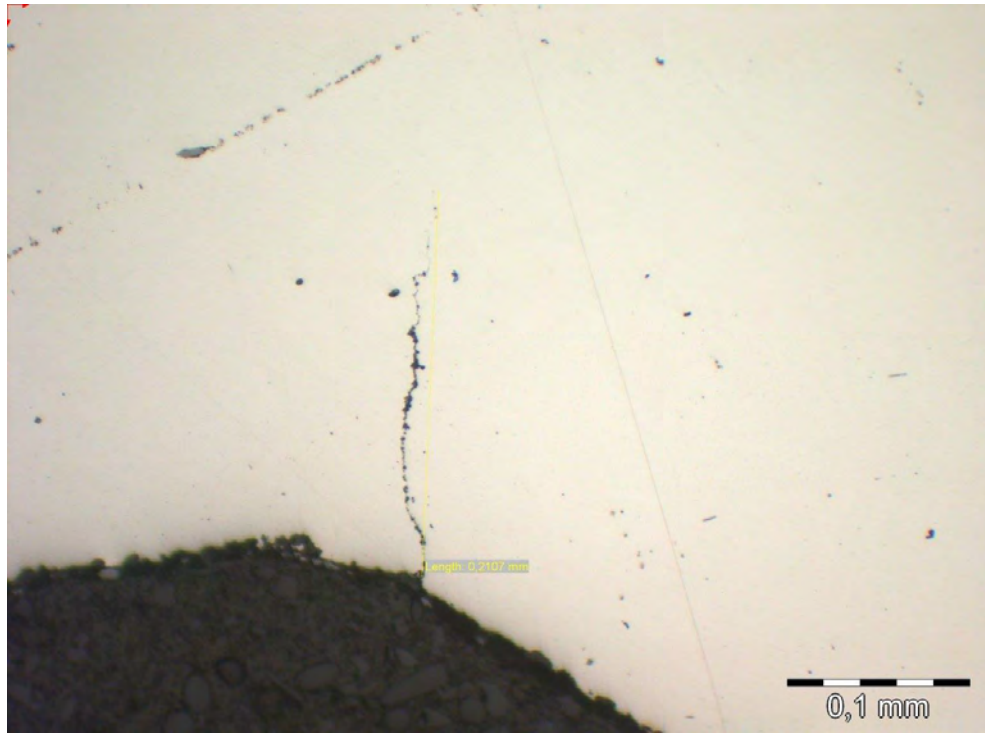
Crack at segment C, second ridge on barrel no. 1613
